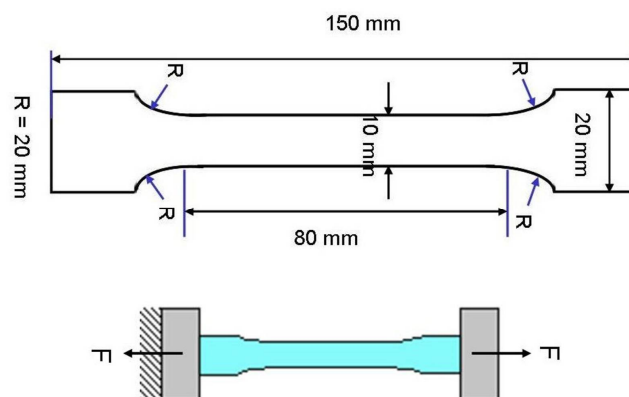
Dimension of tensile specimens and direction of tensile force.
